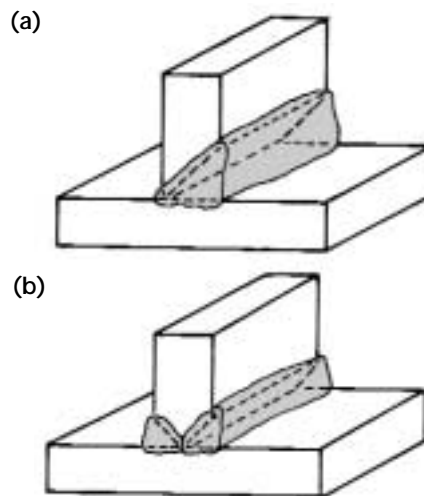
T joints with groove welds: (a) single bevel groove; (b) double bevel groove.
